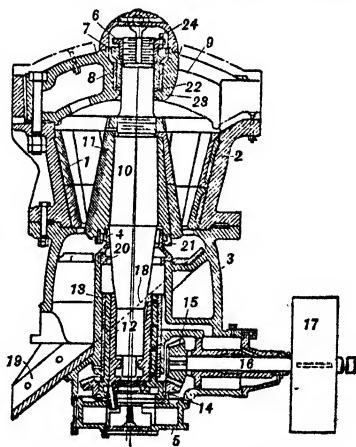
Short-shaft suspended-spindle gyratory crusher.
